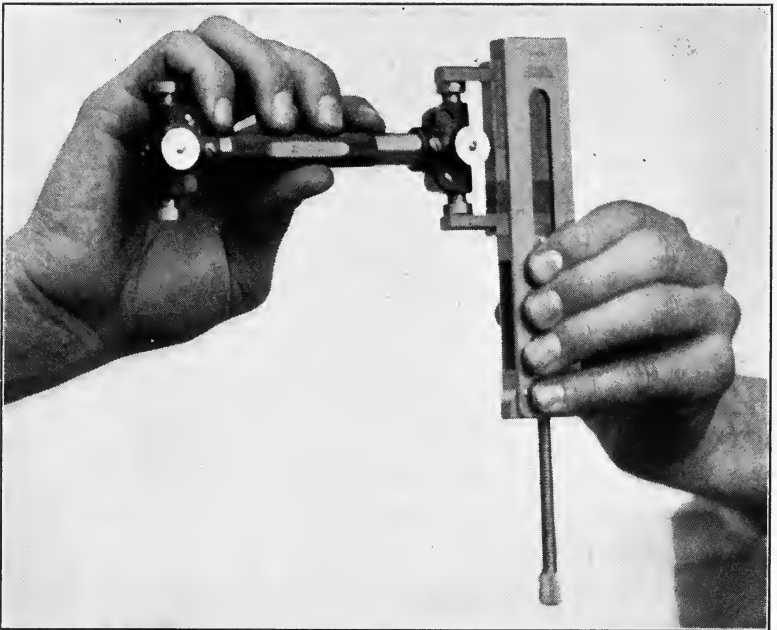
Checking Johansson Adjustable Limit Plug Gage with Gage Blocks Mounted in Holder
